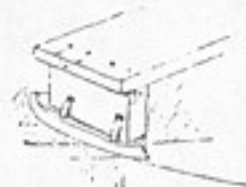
End of Cross-board, showing Runner-block and Skate.
